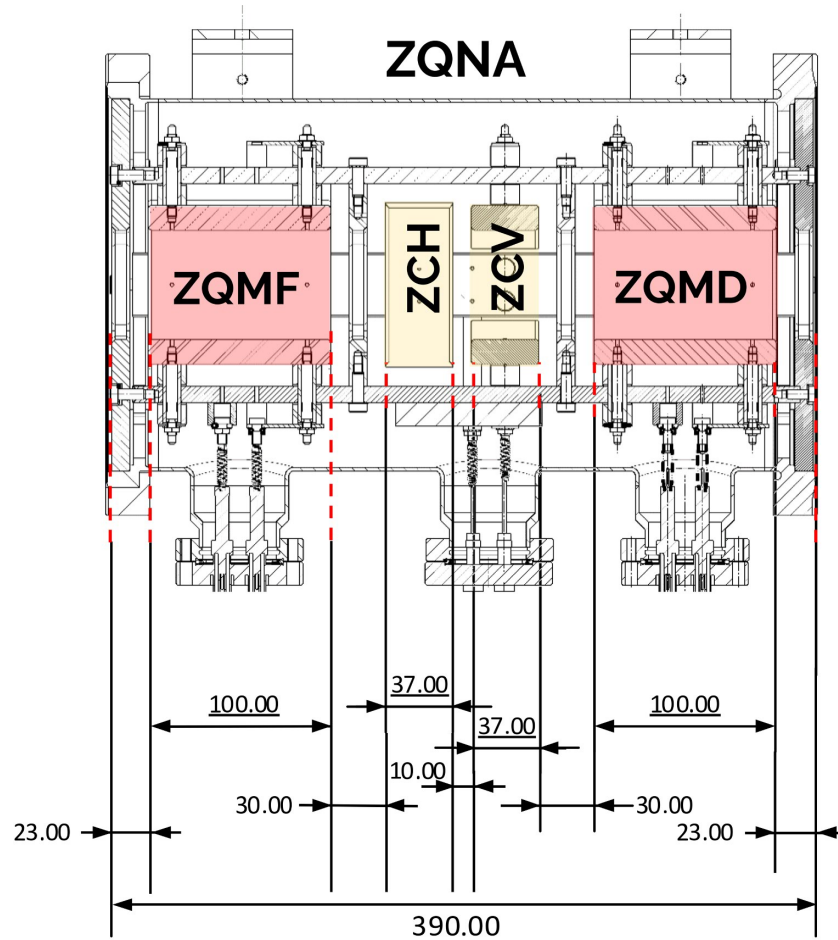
ZQNA assembly drawing with dimensions displayed in millimetres. Electrostatic quadrupoles are highlighted in red, while kickers are marked in yellow colours.
